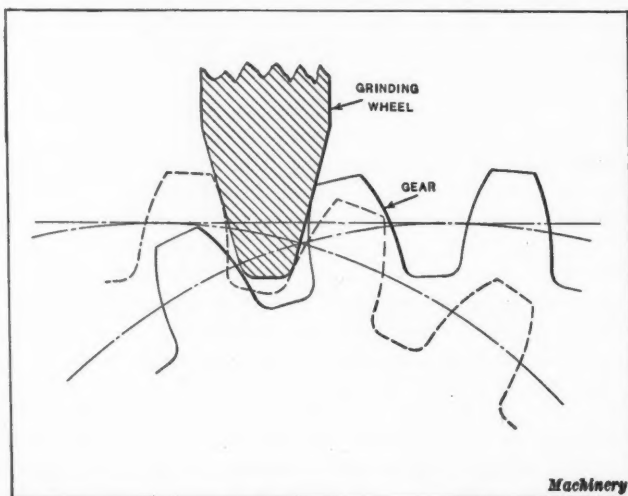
Grinding Wheel which has Rack-tooth Section and grinds on Both Sides
